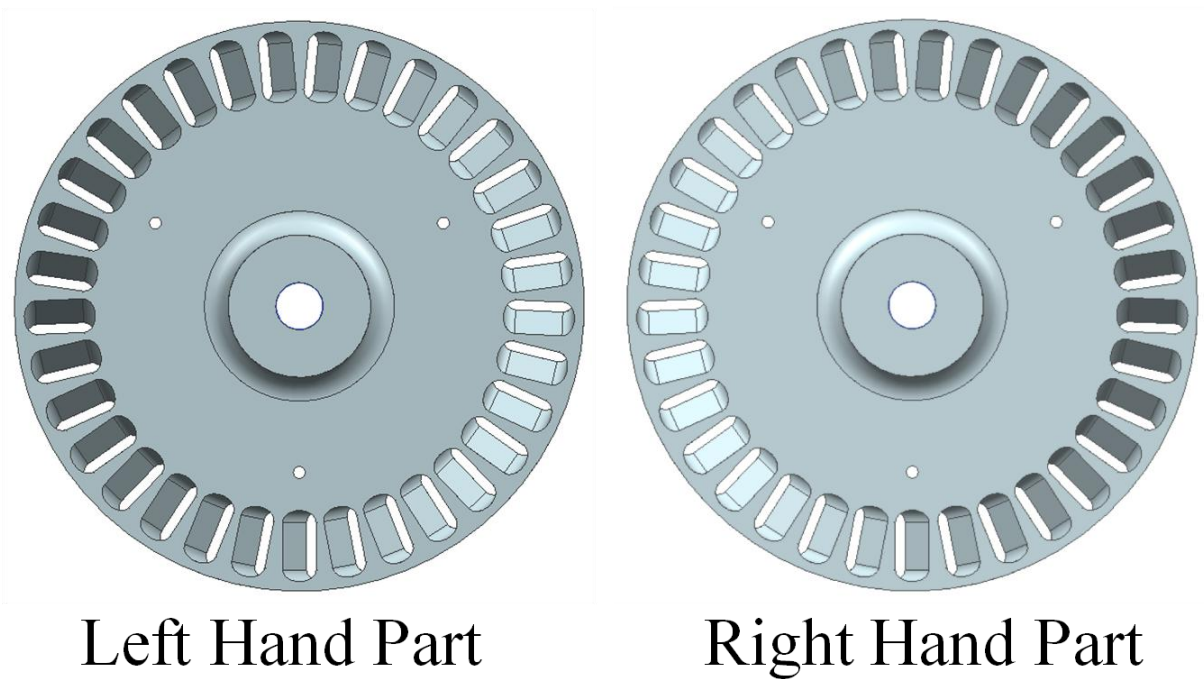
CAD Top View of Left Hand & Right Hand Parts, Scale 1:1
